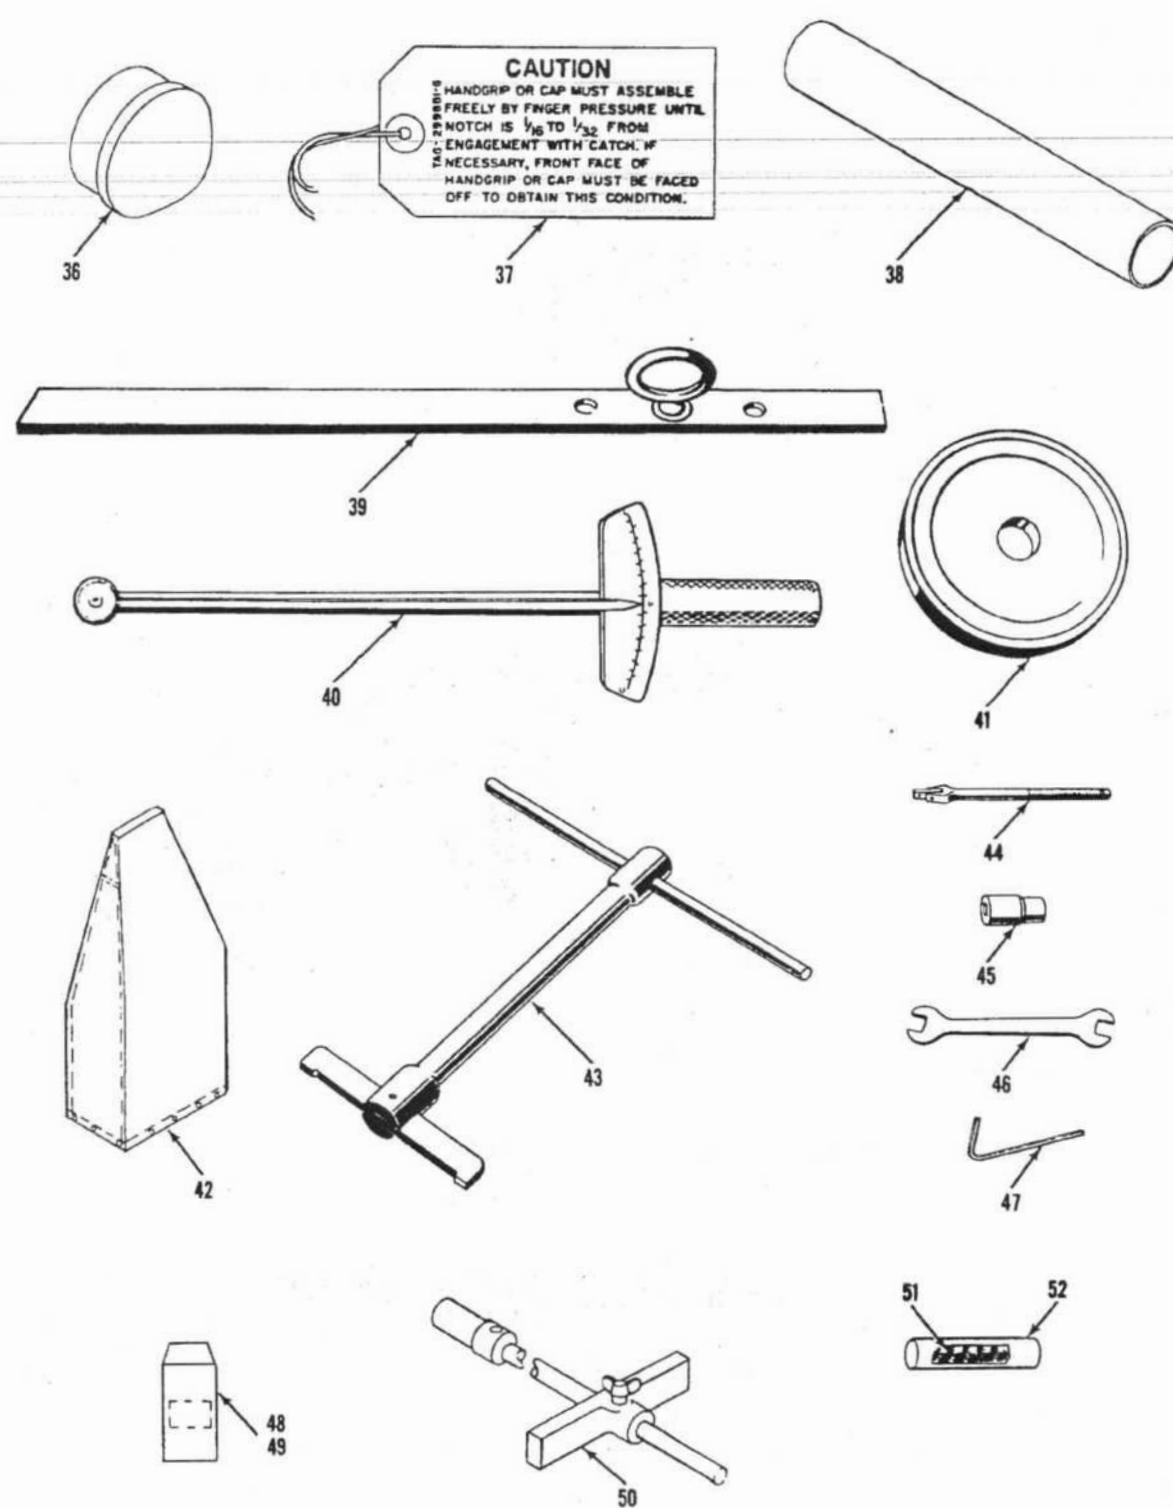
20 MM A.A. Guns and Mounts Special Tools
